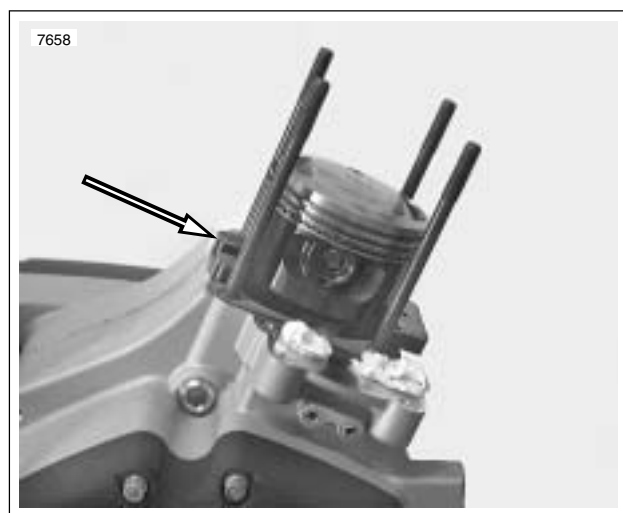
Piston Support Plate (Part No. HD-42322)
